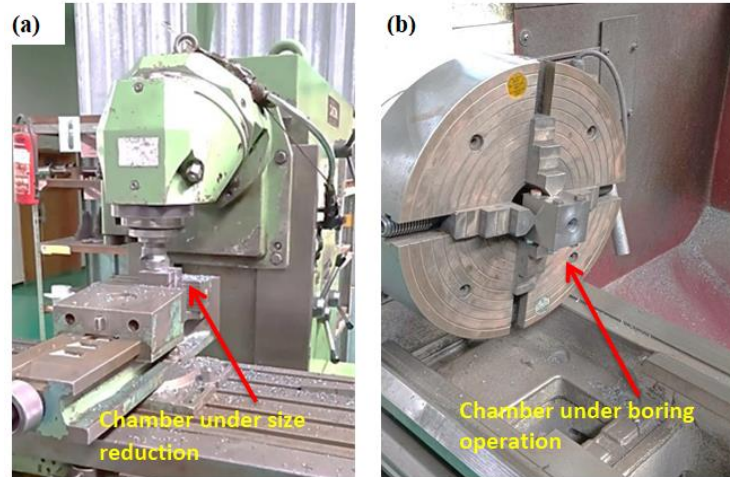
Chamber Preparation (a) Milling (Model: MAQUINARIA CMC-FU3) (b) Lathe for Boring (Model: Harrison M460)
